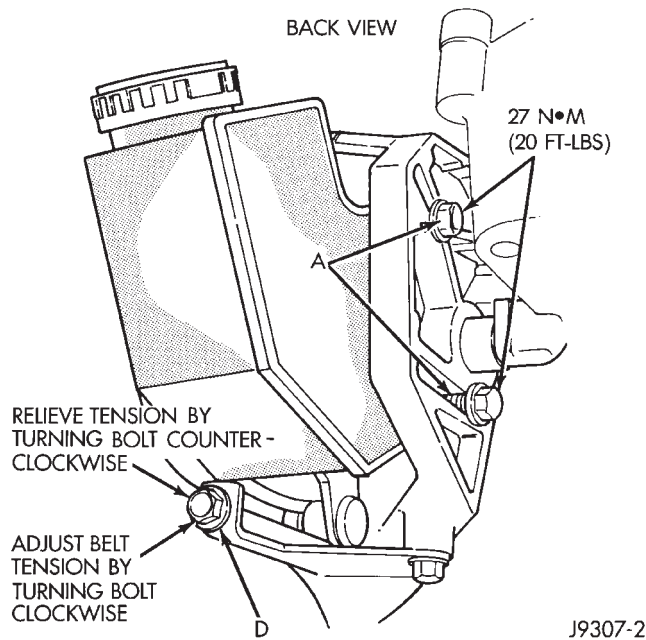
P.S. Pump Rear Mounting Bolts—Typical
